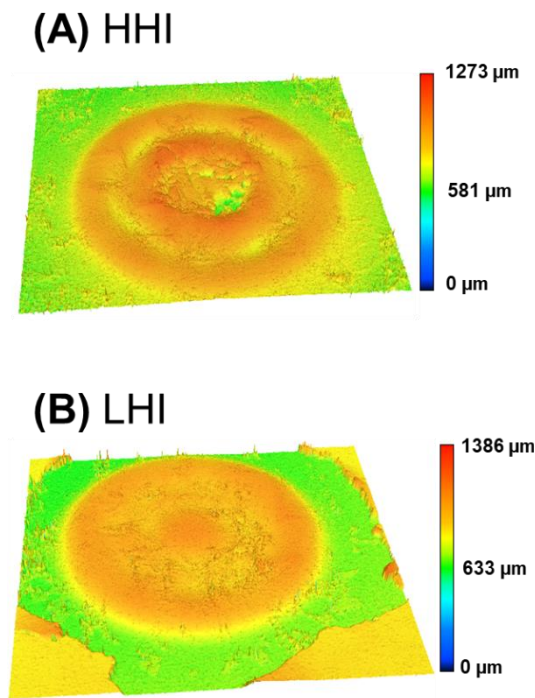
3D images of the aluminum surface after the fracture of the joint obtained by confocal scanning laser microscopy. (A) Metallic nub shaped in two rings for HHI joints. (B) Flat metallic nub for LHI joints.
